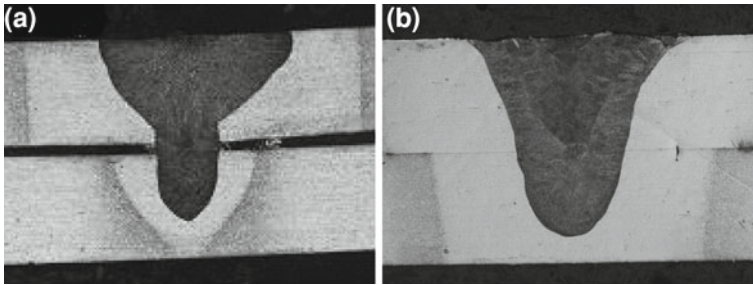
Cross sectional macrographs of 0.8 mm –0.8 mm thick maraging steel sheet lap welds made with (a) CW CO₂ laser welding at 2 kW laser power and welding speed 2.3 m/min, (b) pulsed Nd:YAG laser welding—300 W Average Power, 2 kW Peak Power, 0.26 m/min
